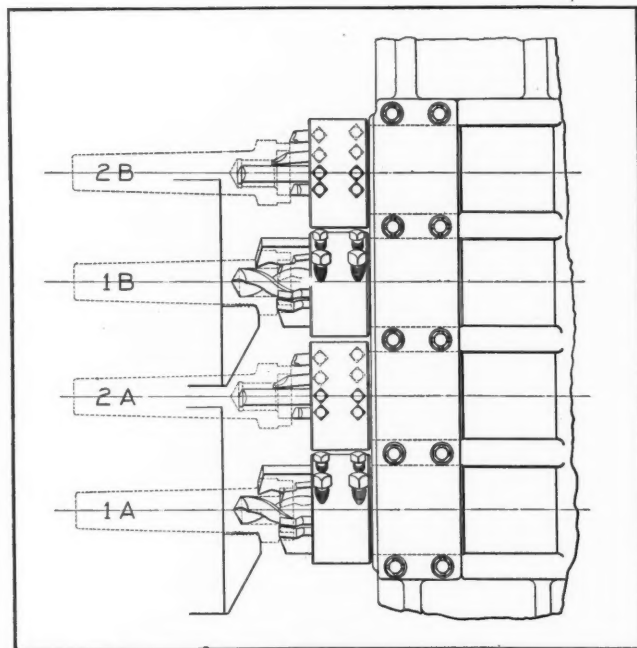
Machining a Clutch Shaft on a Double-spindle Production Lathe
